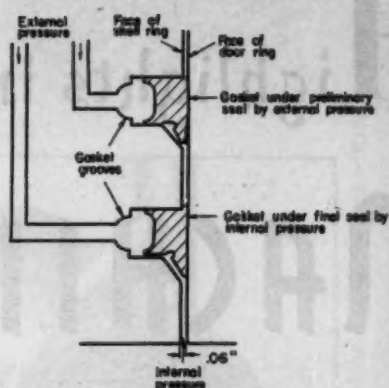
Right - Schematic illustrates how special rubber gaskets seal door against leakage
